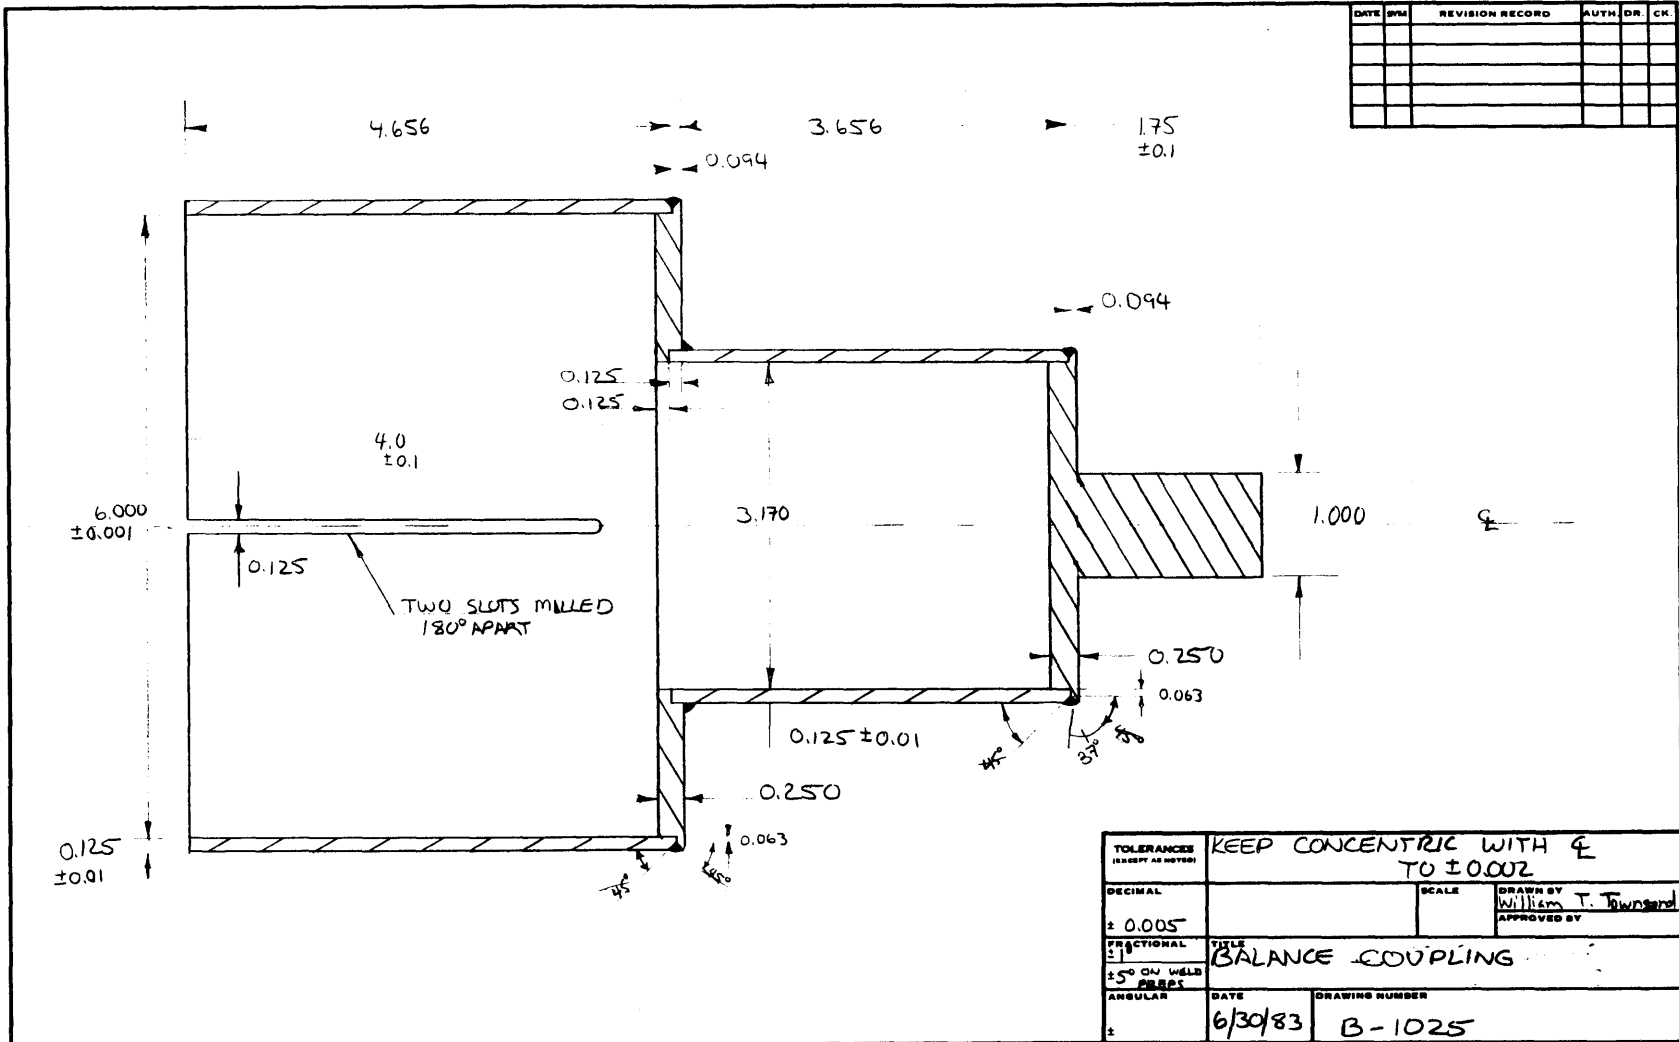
DRAWING OF ROTOR END OF DRIVE COUPLING
